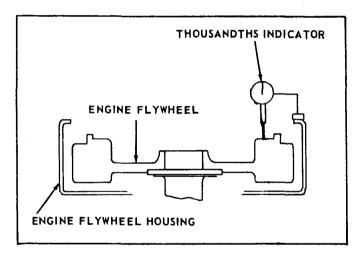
Checking the Driving Ring Surface of the Engine Flywheel.
